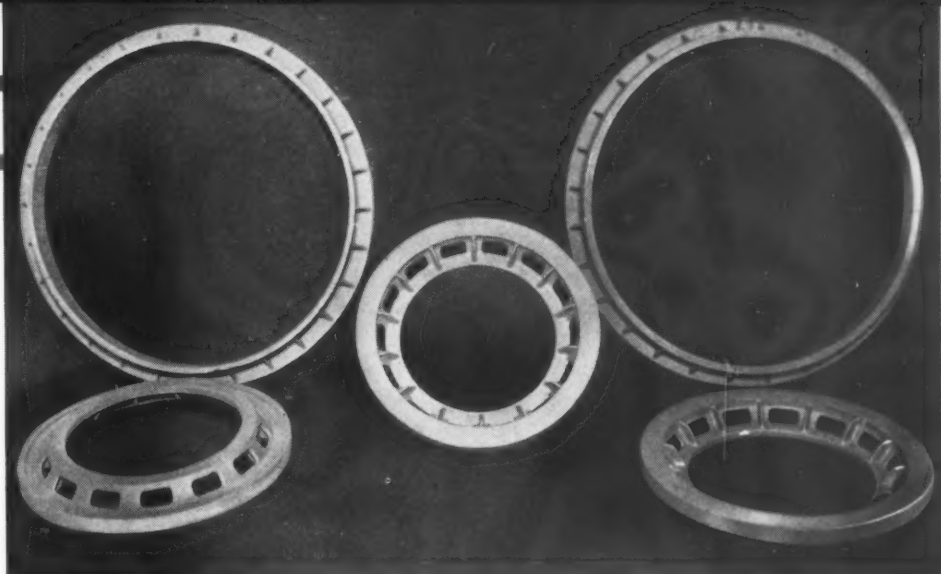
Surfaces of the centrifugal casting are machined to facilitate visual inspection
